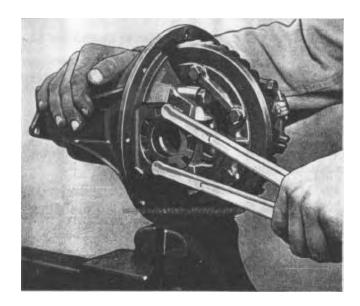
Adjusting Differential Bearings—HM-576 Differential Bearing Adjusting Nut Wrench
